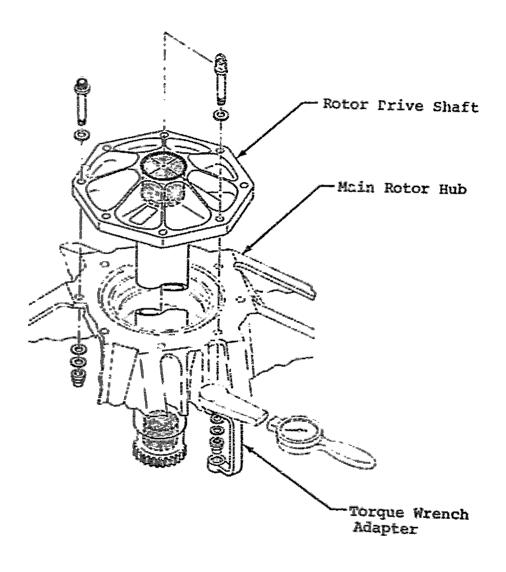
Rotor Drive Shaft-to-Hub Attachment, OH-6 Helicopter.
